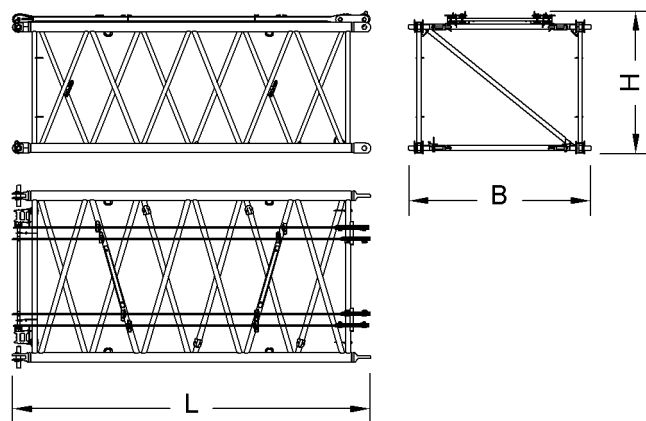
2821 boom section dimensions 20 ft for LR1300SX/LR1300SXW
